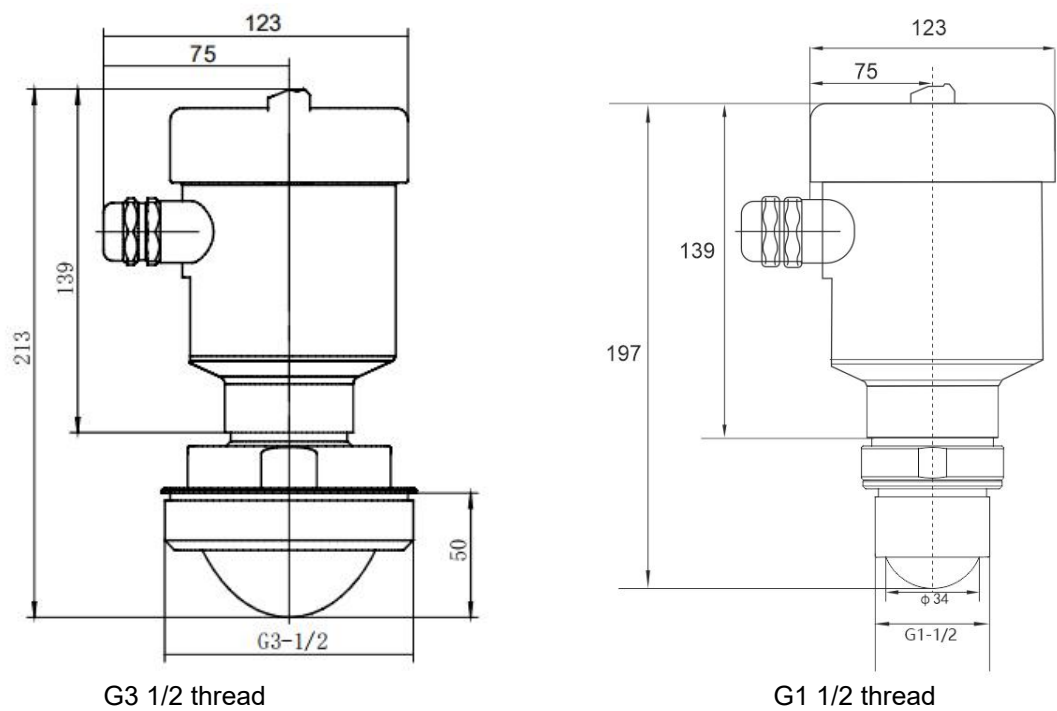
Dimensional Drawing of Standard Temperature Threaded Connection Structure (Unit: mm)
